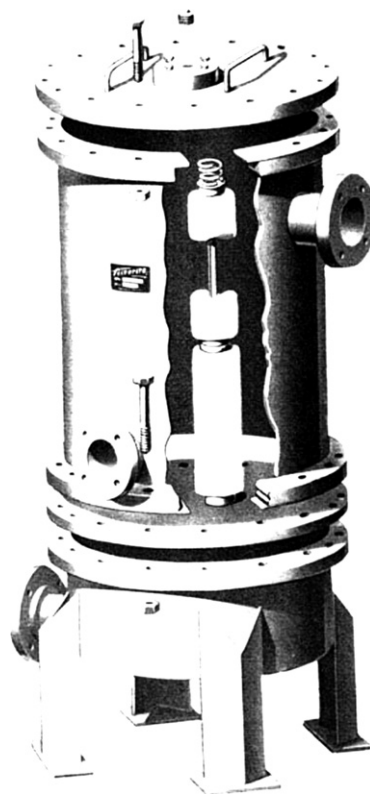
• Depth type filter assembly drawing (Courtesy of Filtrerrite)
